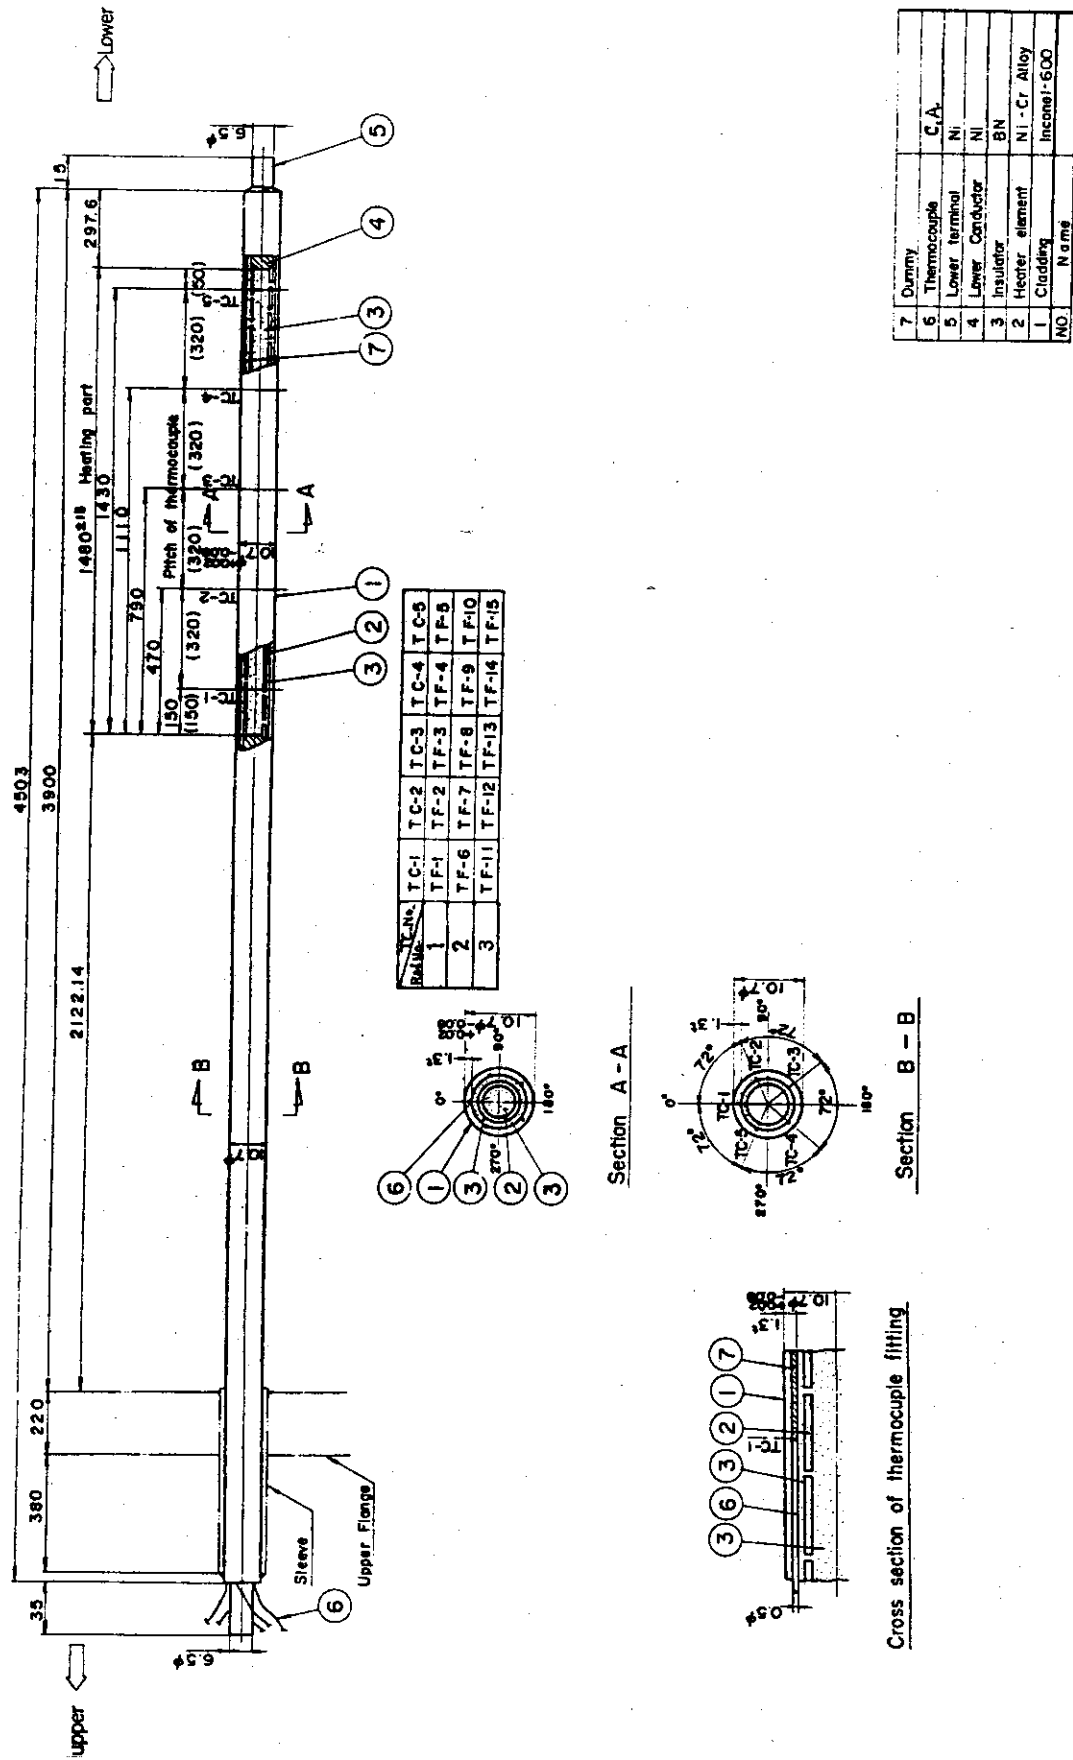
Structure of Instrumented High Heat Flux Rod in No.1 Assembly
